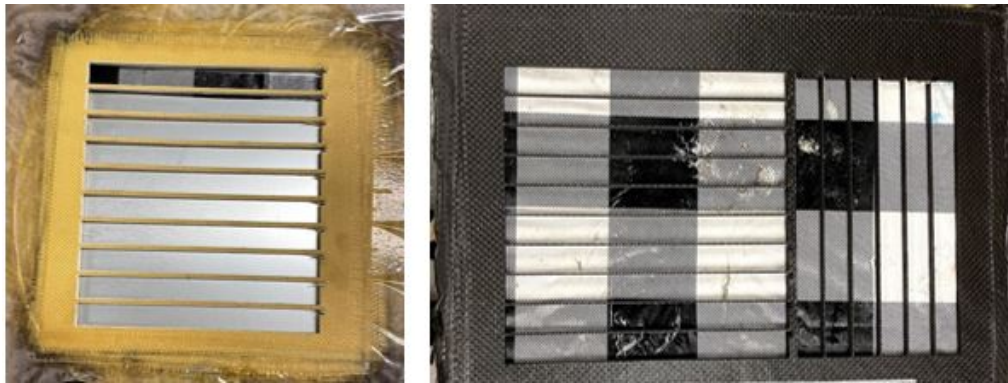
Kevlar and carbon laminates after samples were water jet cut and removed
